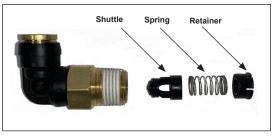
SC-3 Single Check Valve Internal Components - Spring and Shuttle
